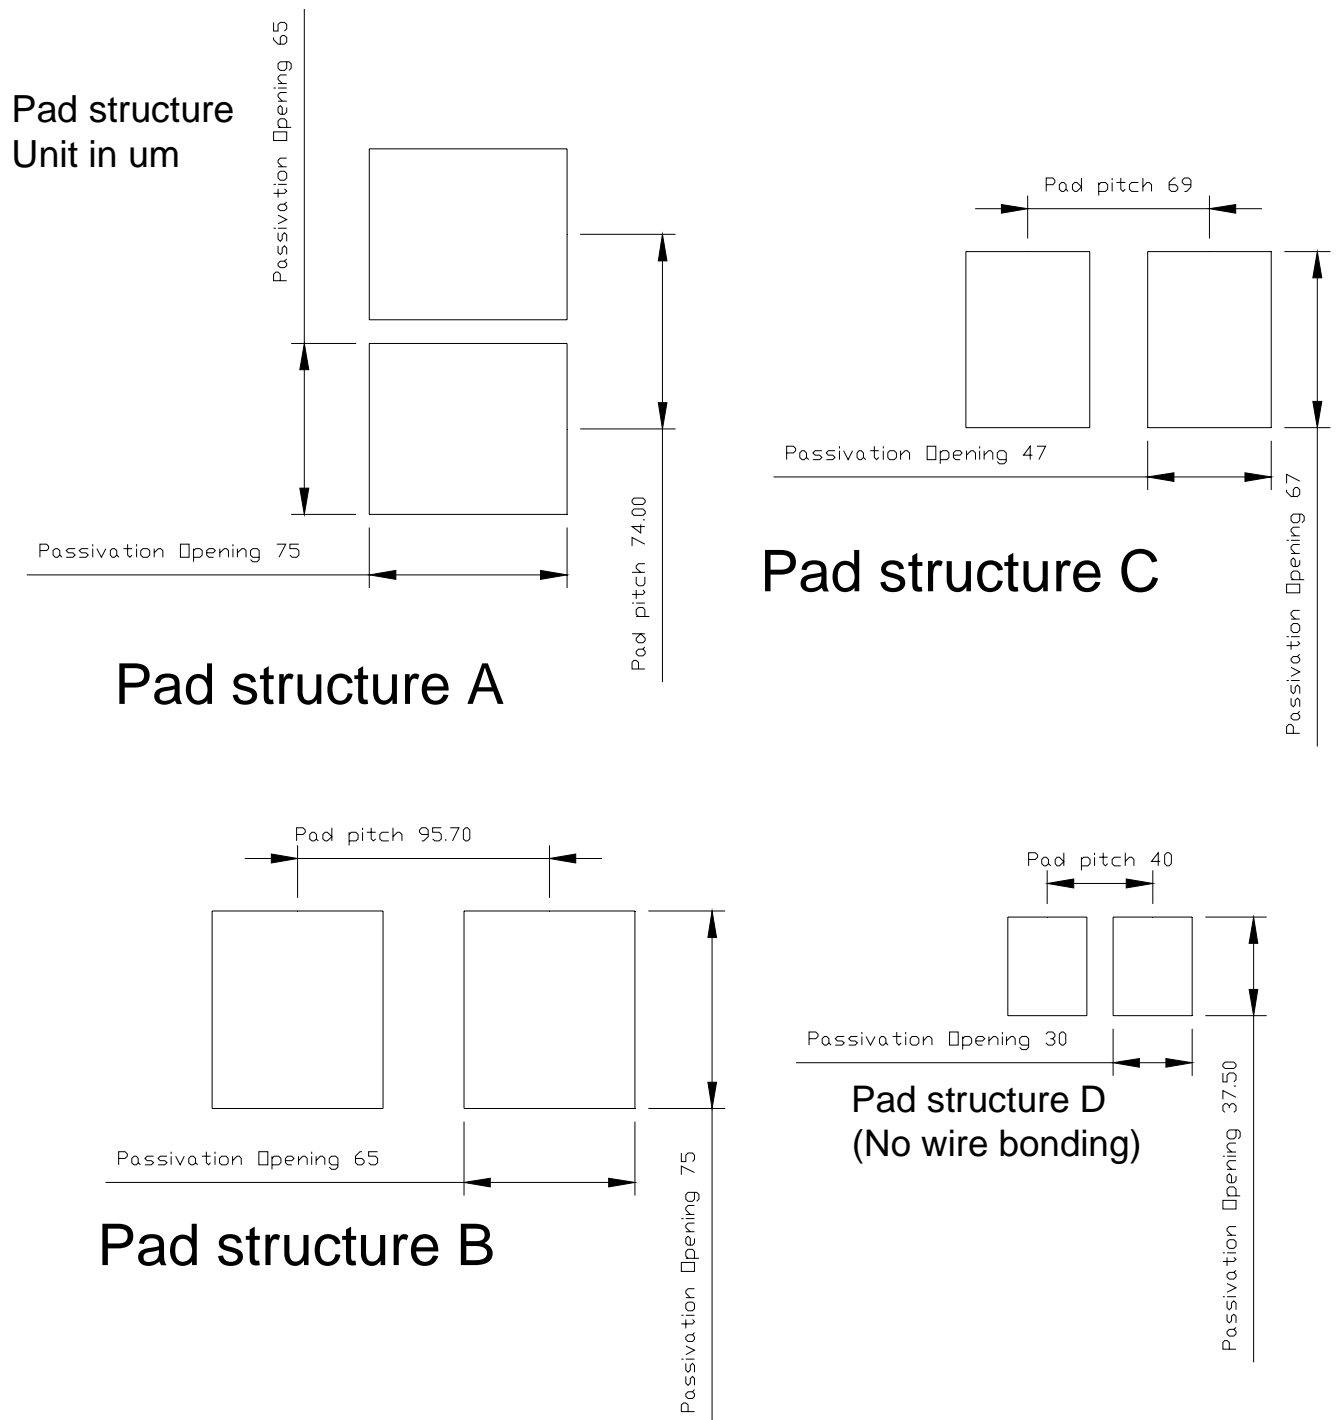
SSD1623Z – Gold bumped chip pad layout
